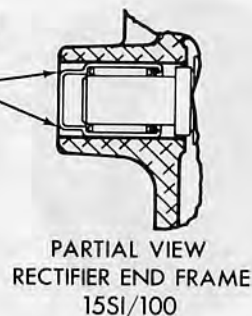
Slip ring end frame bearing assembly, 15-SI.
